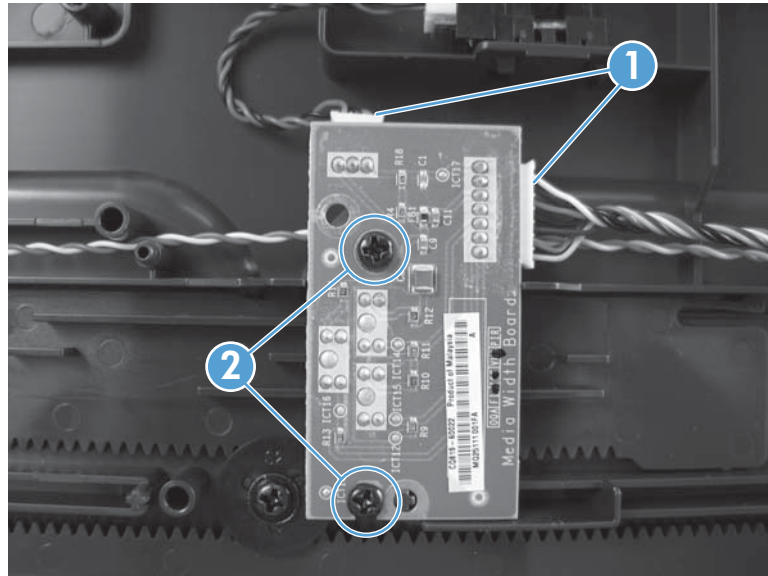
Remove the document feeder width-adjust sensor, paper-short and paper-long sensors
